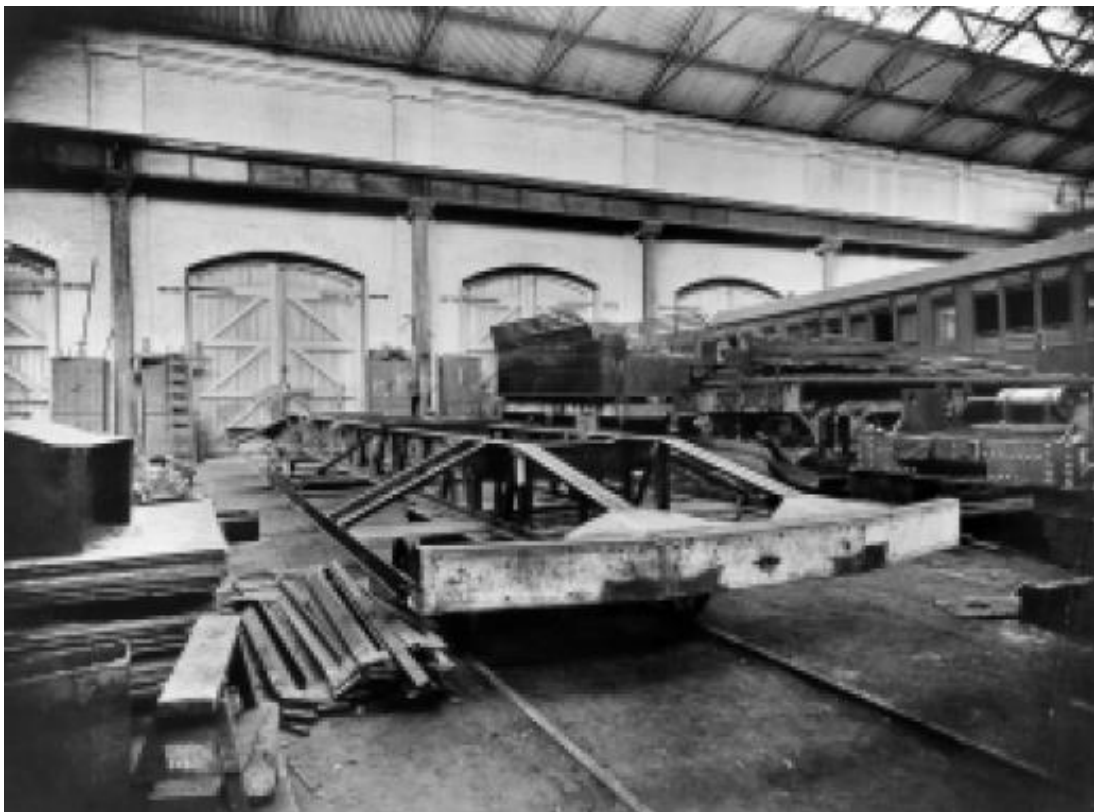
Bay 16 of the Carriage Workshops, 1920s. Photograph showing a steel rail motor underframe being constructed. The large doors along the internal brick façade would have opened up towards the Paint Shop (Source: SRAO)
